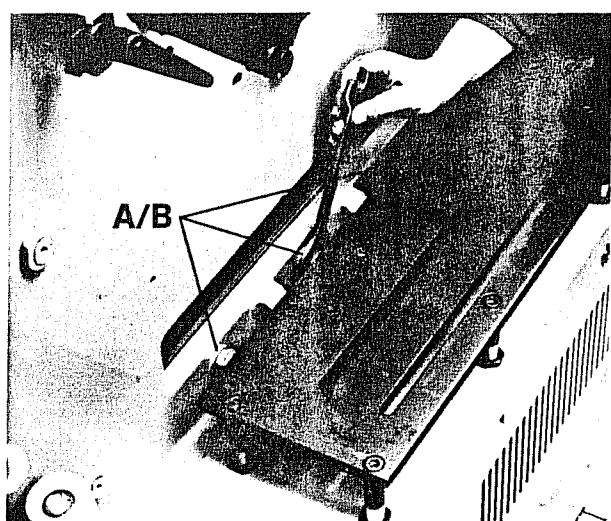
Changing the lower flat steel blade (KBLH 500/700)
